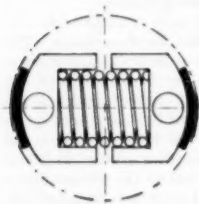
SYMMETRICAL SECTION—PERPENDICULAR TO CYLINDER AXIS—OF SPRING-LOADED DEVICE FOR MOUNTING AND CURING BAKELITE GAGES
